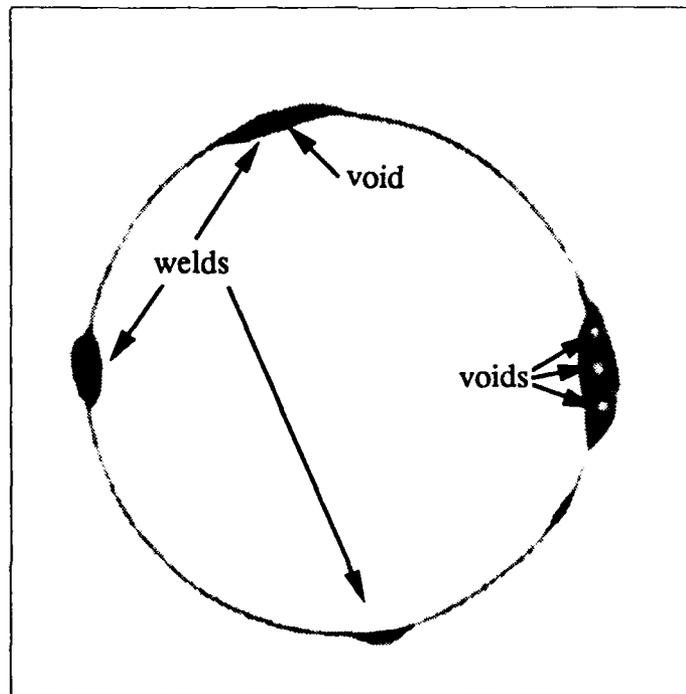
CT slice of tack welded ducting revealing internal defects.
